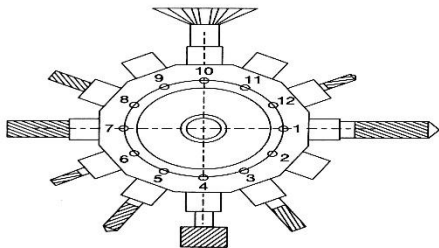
Typical tool turret used in CNC drilling/milling machines
